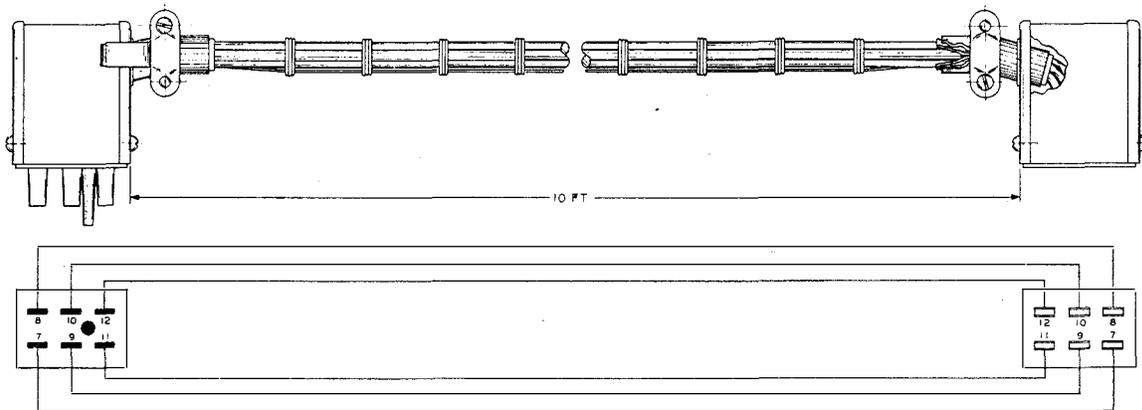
CFI Test Cable Assembly (Dwg. No. 500 3999 00B)
